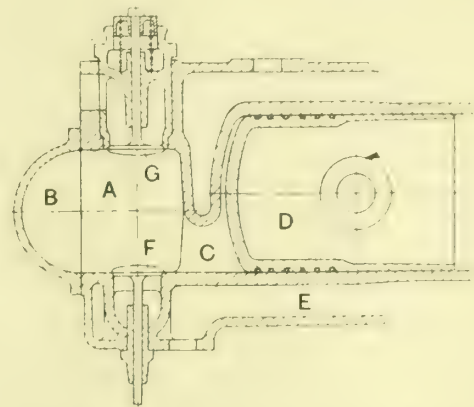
CROSSLEY'S COMBUSTION CHAMBER FOR OIL ENGINES.
